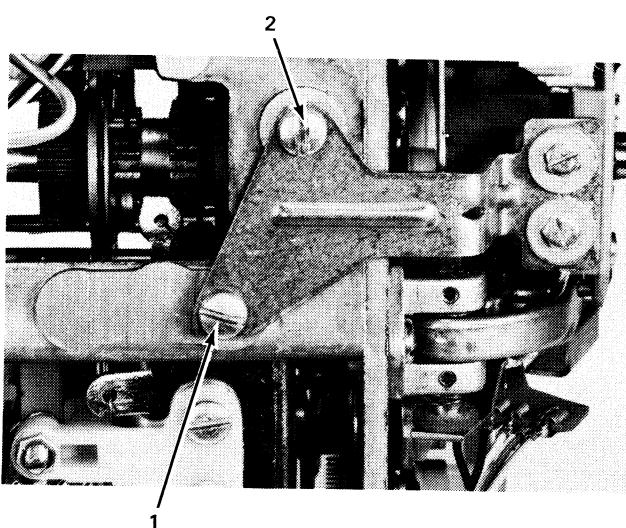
Shift Cam Removal (Printer Tilted Up)
